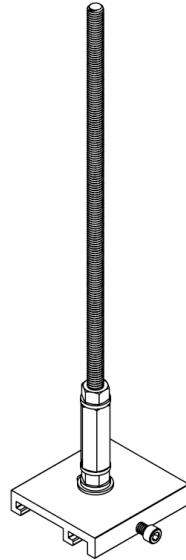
Hex Nut Tightened so Lock Washer is Fully Compressed
